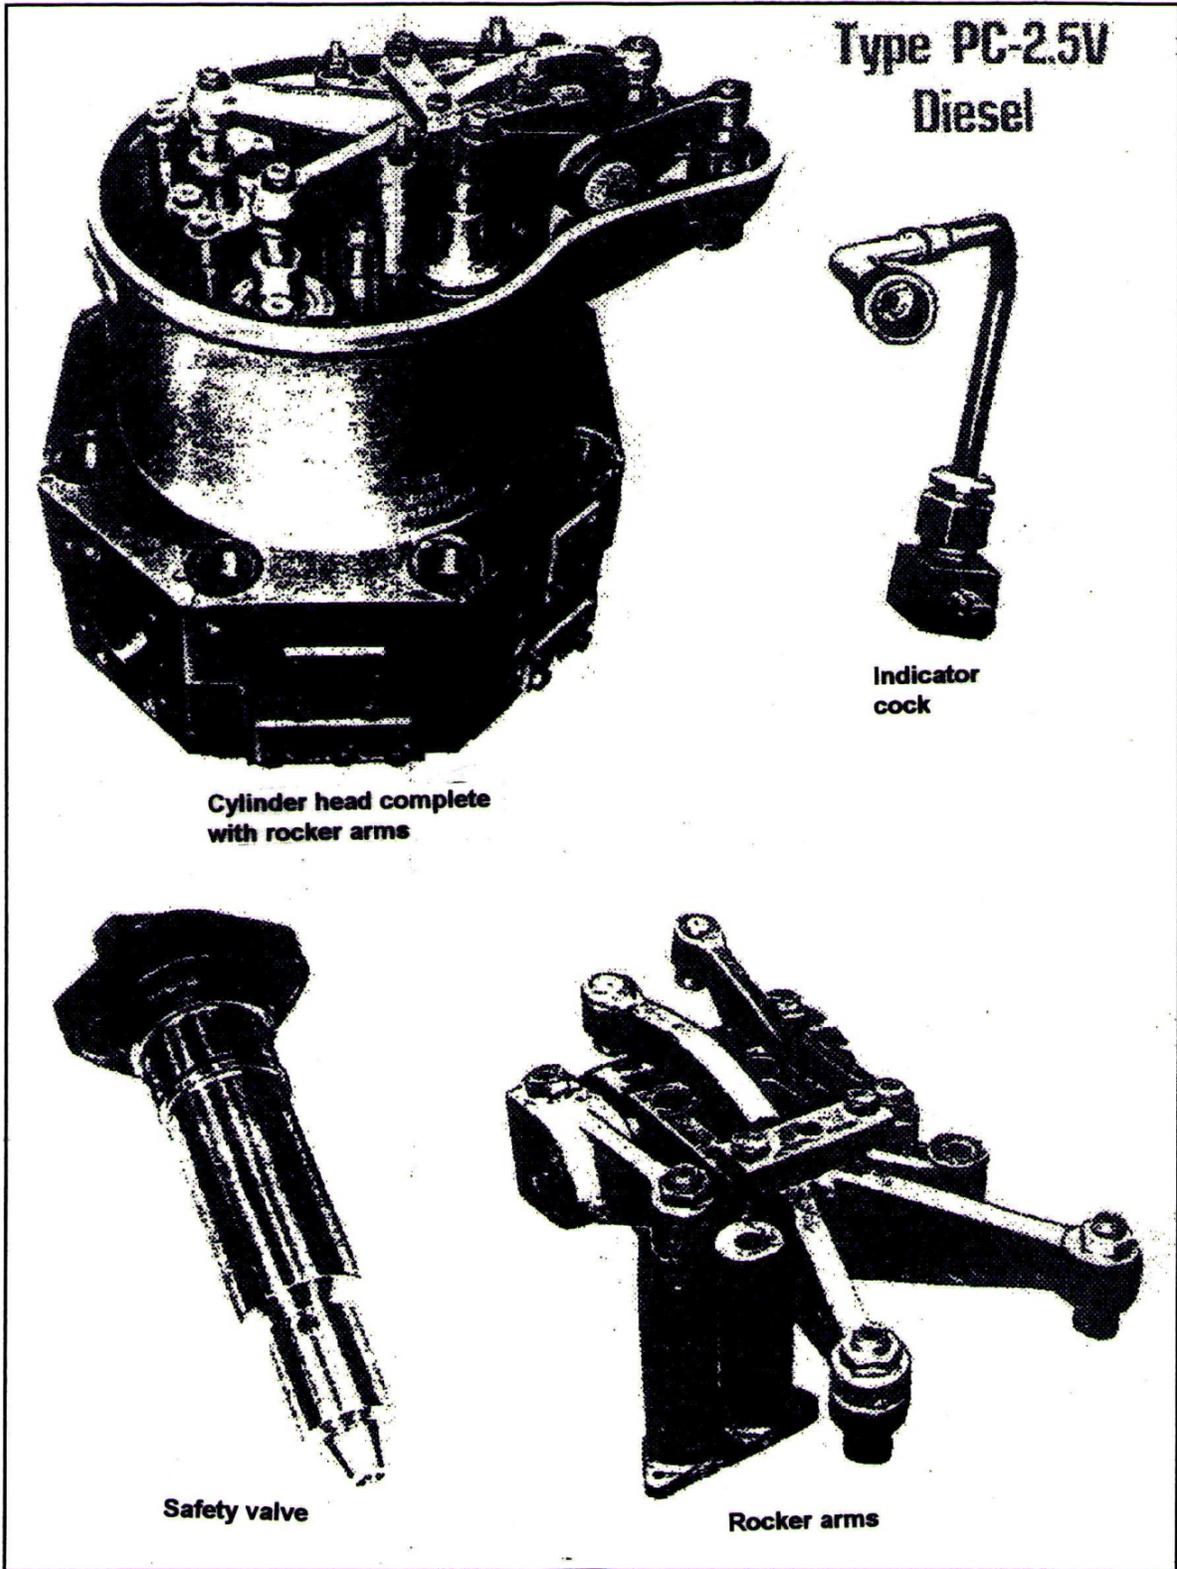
Cylinder Head with Rocker Arm Assembly
